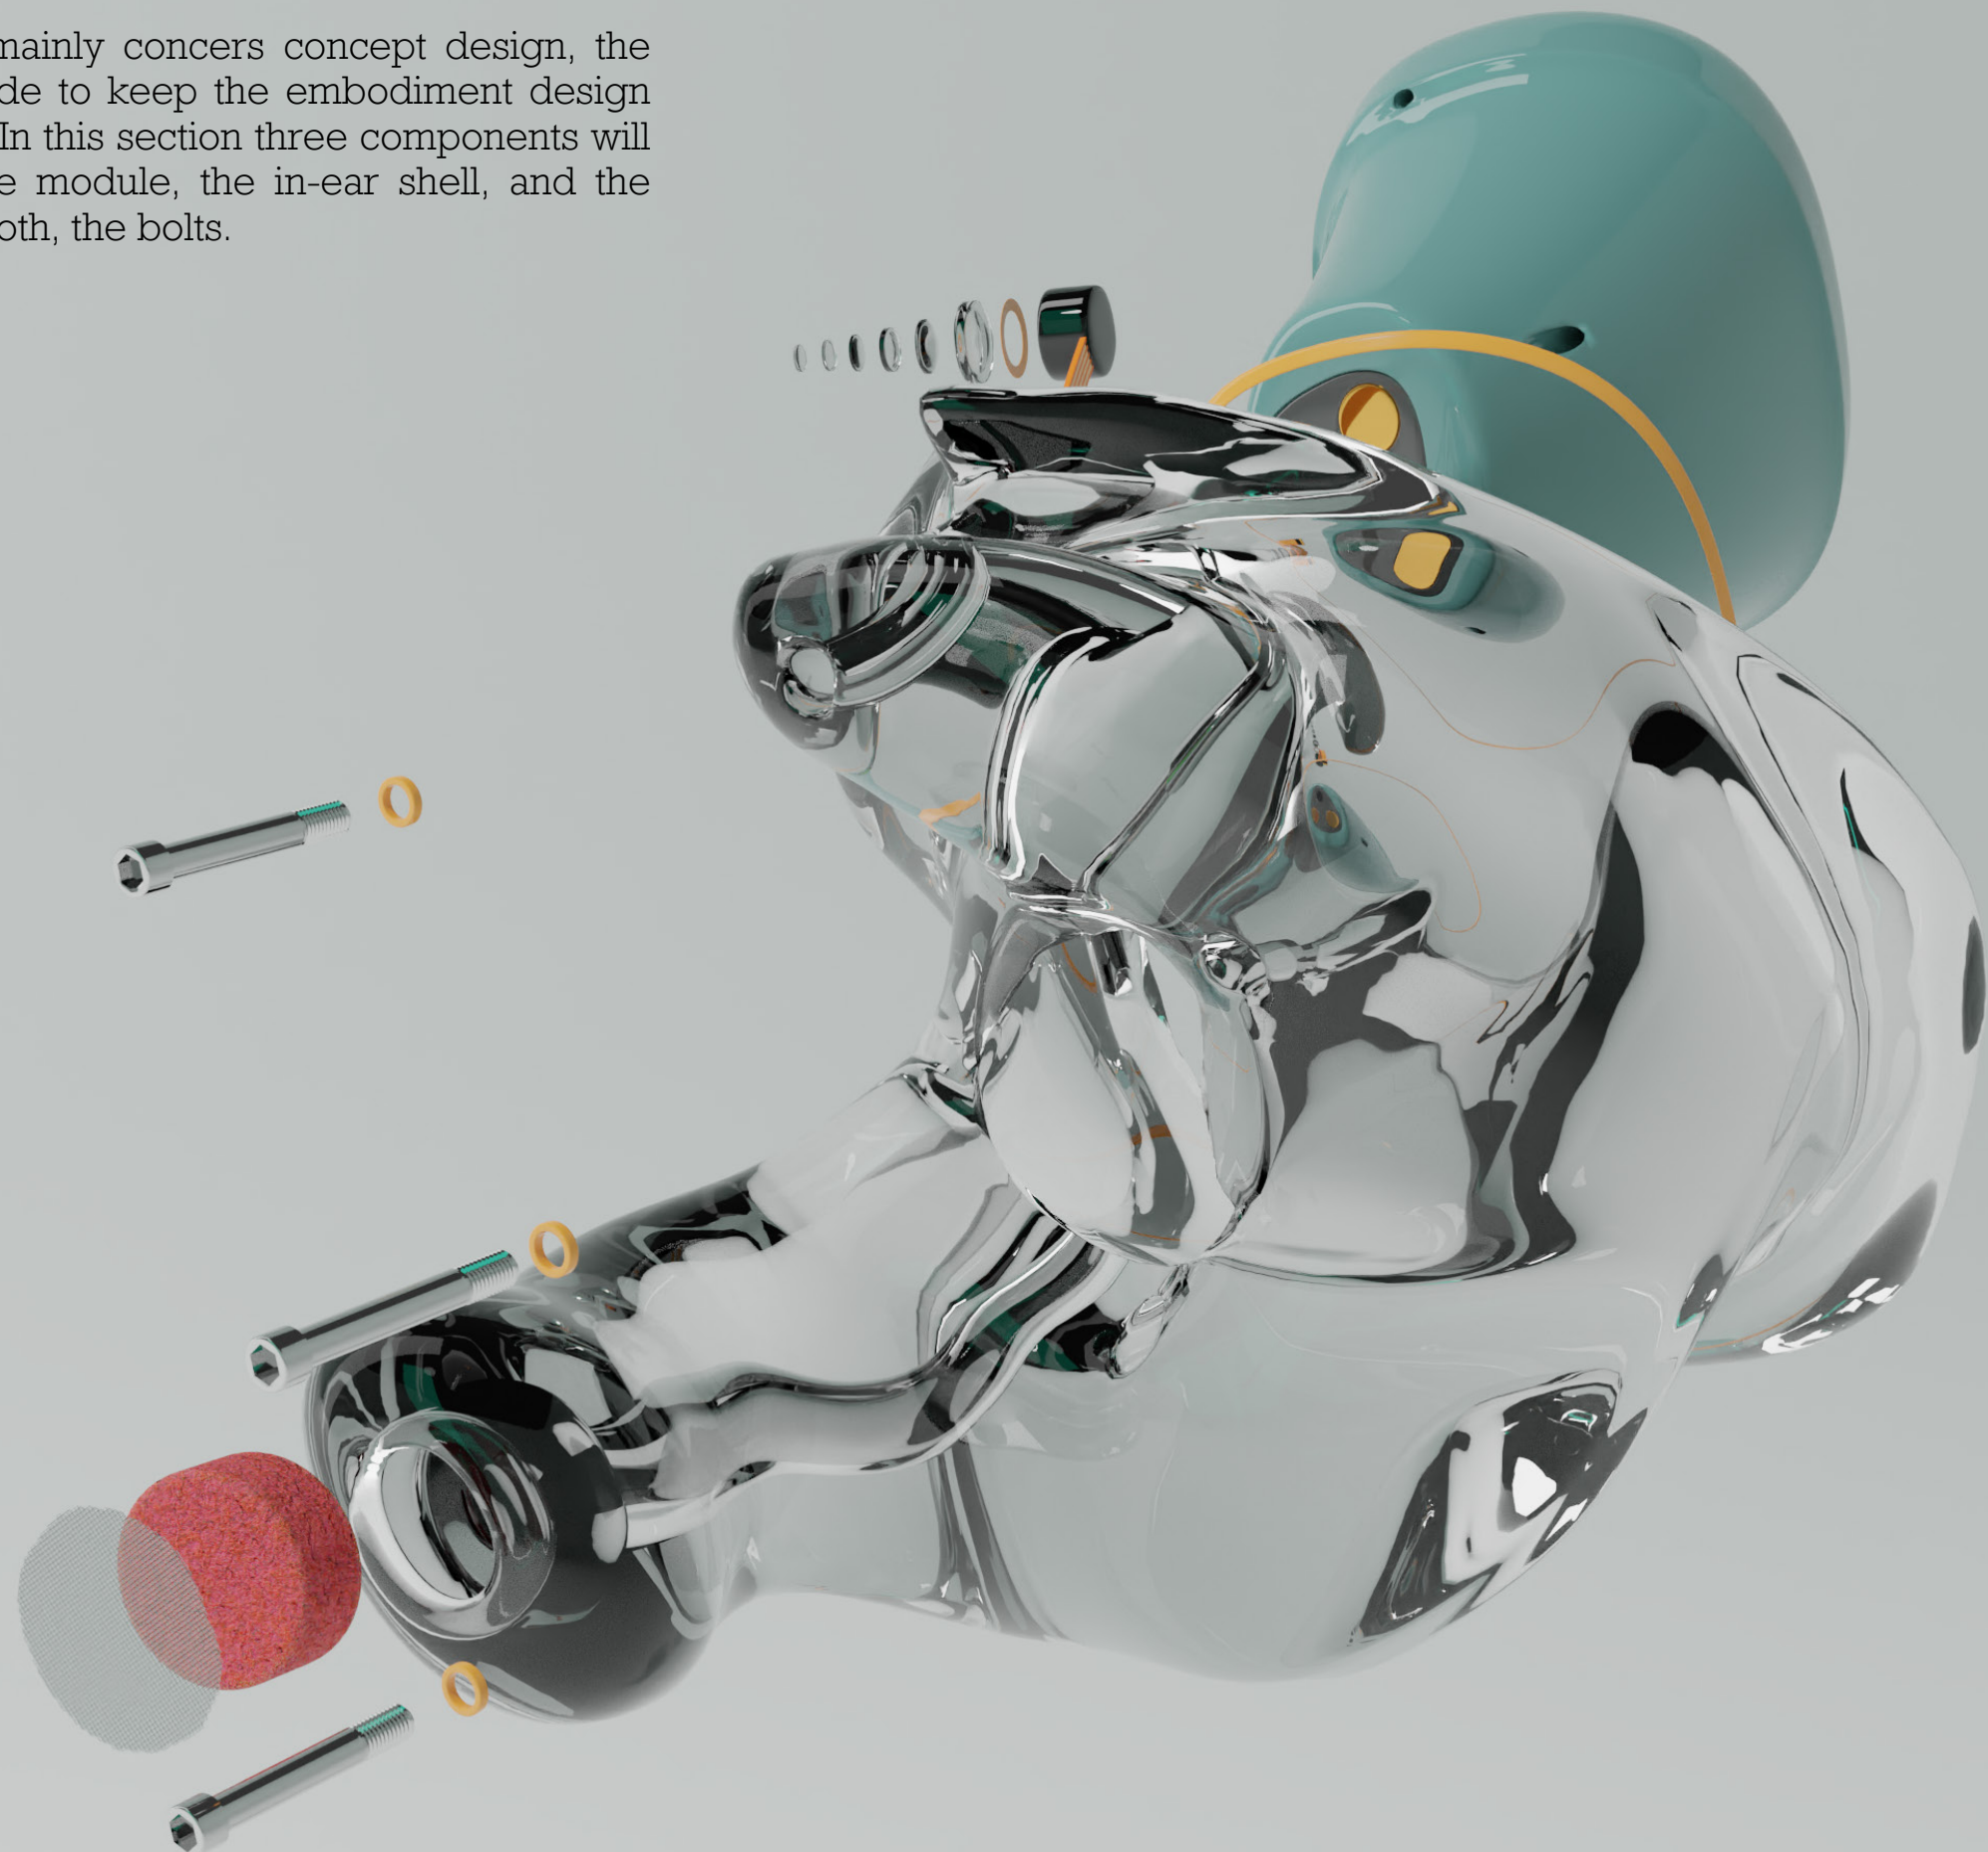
Exploded isometric view of a Dopple Earbud IEM.
